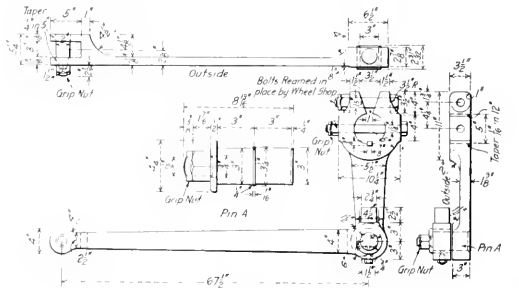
Eccentric Crank and Rod of Burlington Locomotive
